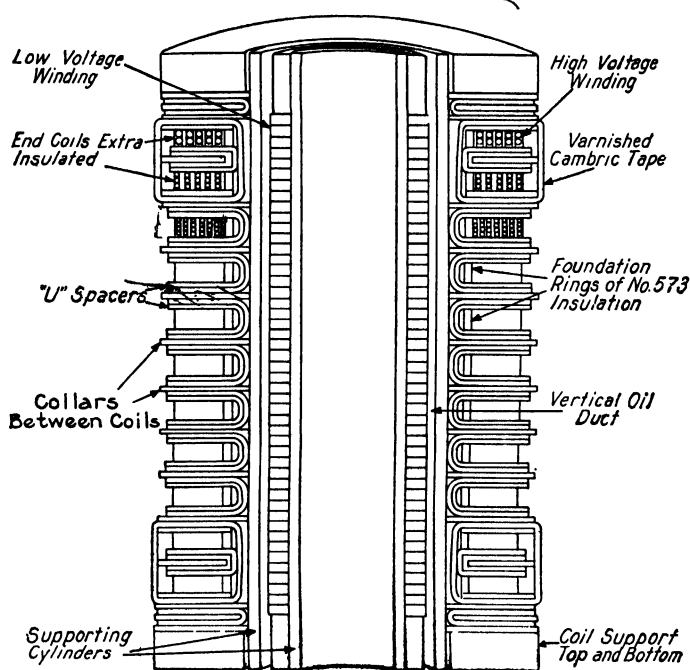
Section of concentric type winding with disc-type high-voltage coils.
